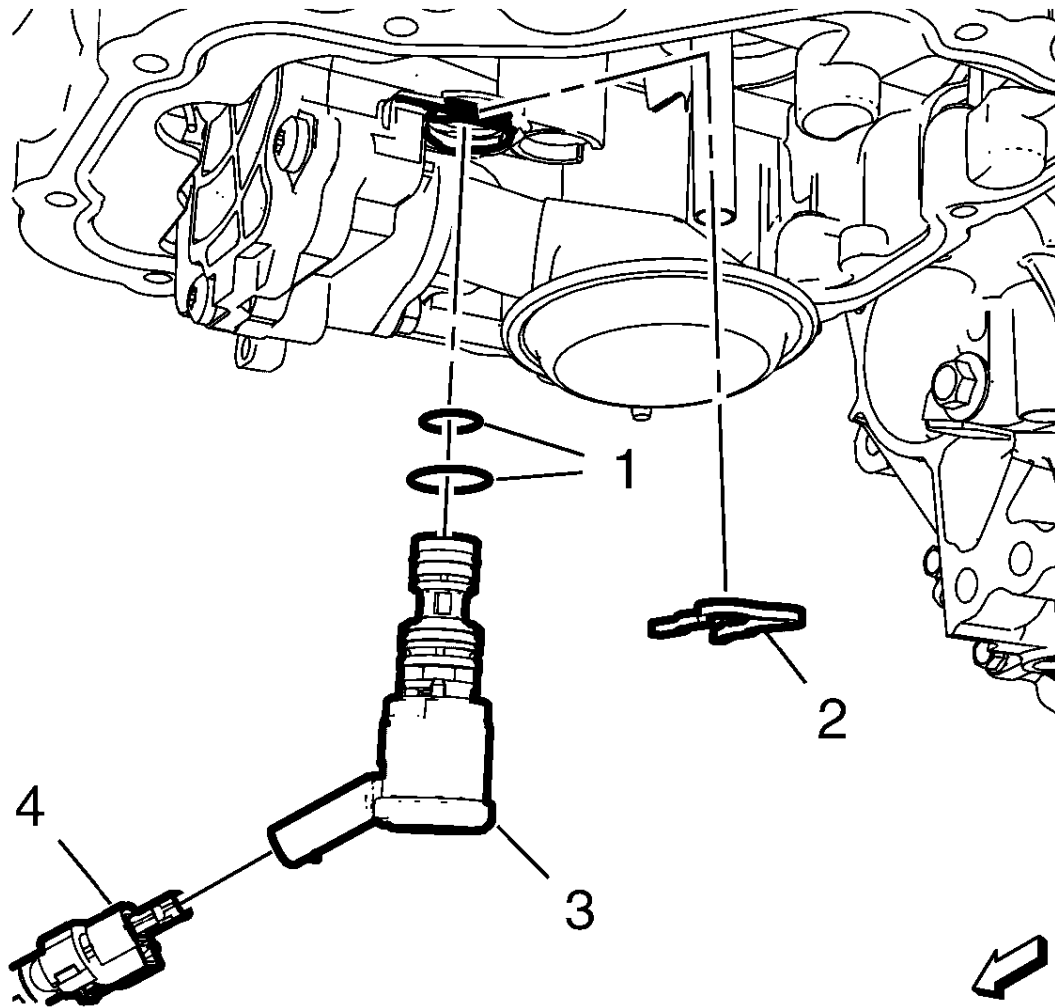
Oil Pump Flow Control Solenoid Valve, Wiring Harness Plug, Retainer Clamp And Seals
